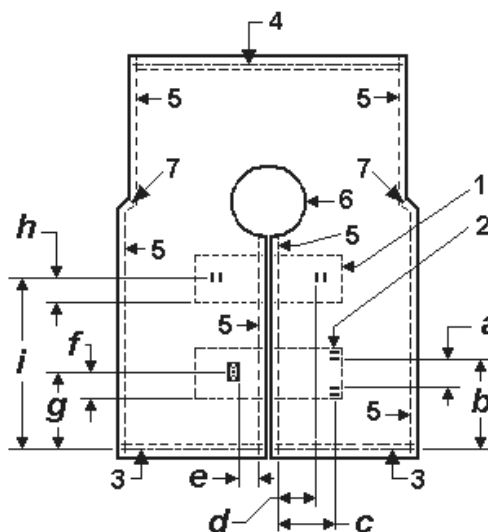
Chest strap assembly (adjustable part left and fixed part right)
